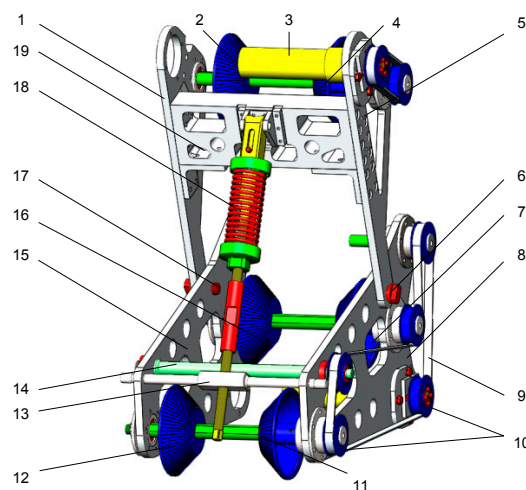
The structure of the climbing robot. 1—Left swing plate; 2—Left half-wheel B; 3—Motor 2; 4—Right half-wheel B; 5—Right swing plate; 6—Right hinge; 7—Right half-wheel A; 8—Right support plate; 9—synchronous belts; 10—Synchronous pulley; 11—Right half-wheel C; 12—Left half-wheel C; 13—Lower support bars; 14—stop lever; 15—Left support plate; 16—Left half-wheel A; 17—Left hinge; 18—Spring mechanism; 19—Upper support bars.
